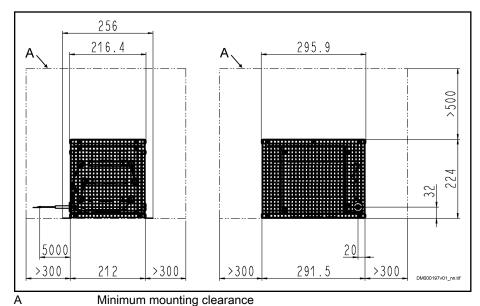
Dimensions (with Upright Mounting on the Floor)
